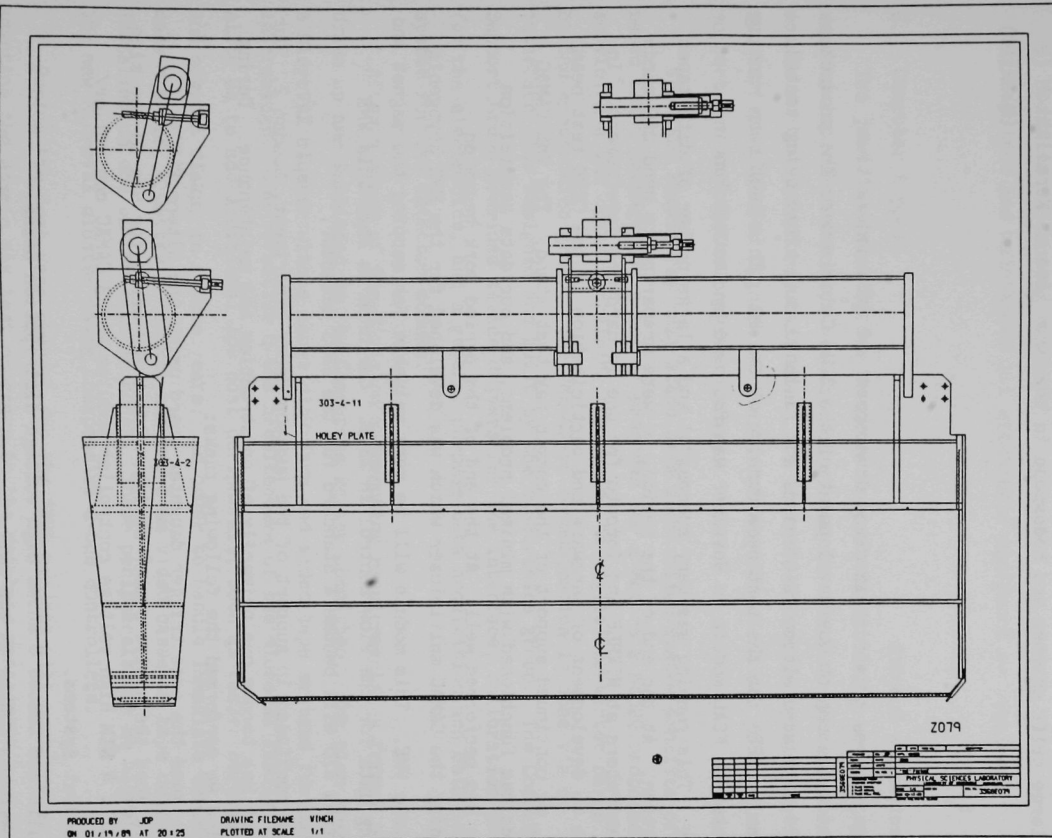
Adjustable lifting device to be used for installation of ZEUS BCAL modules.
